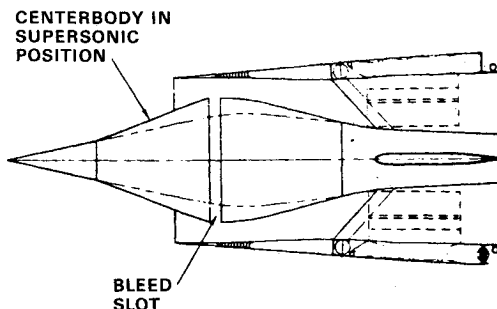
2.3/AX/SS inlet for GE21/J11B19 engine.
